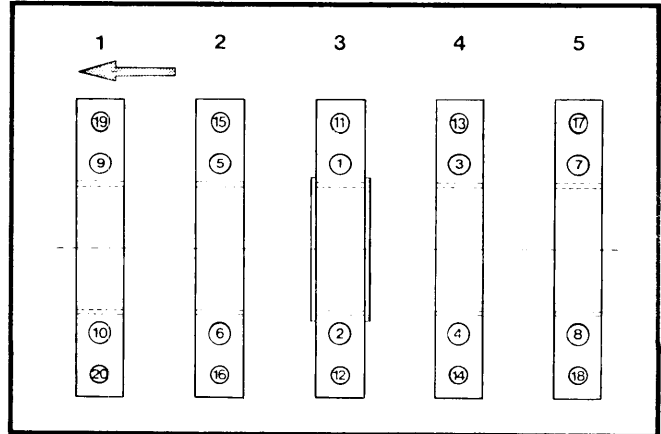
Crankshaft Main Bearing Tightening Sequence
